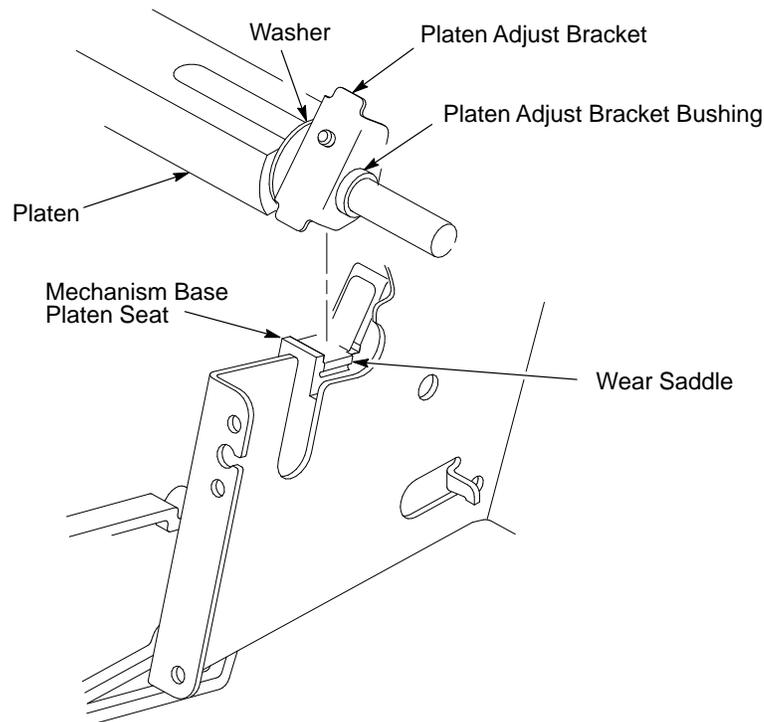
Alignment of Platen Adjust Bracket Bushing
